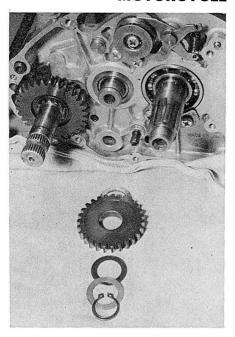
Arrangement of thrust washers on kick starter idle gear on F5 model. F8 does not have washer beneath gear. 175 and 125cc models have two thrust washers under gear as shown in Fig. K4-11.
